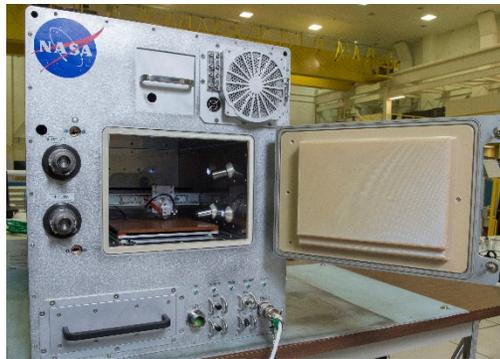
TUI's Refabricator, capable of printing and recycling print material [8]
